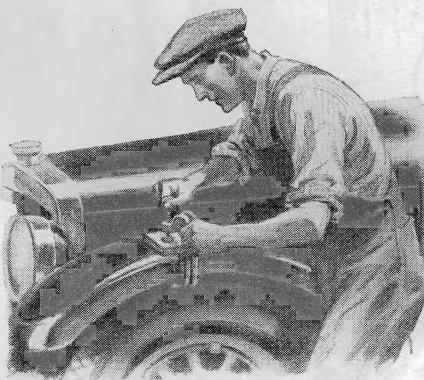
You can use a C-clamp and two blocks of smooth, hard wood to flatten out mud guard dents
